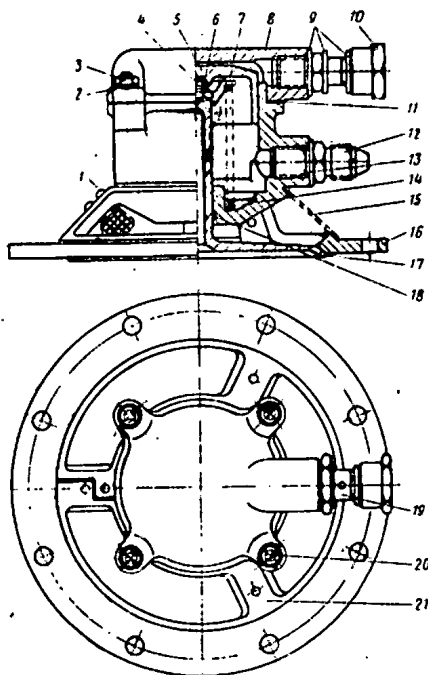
Air bleed valve - 1. Rivet; 2. Lock washer; 3. Nut for fastening cover; 4. Heel; 5. Piston; 6. Safety lock; 7. Plate; 8. Cover; 9. Aluminum gasket; 10. Nut; 11. Packing; 12. Tube fitting; 13. Aluminum packing; 14. Spring; 15. Screen; 16. Body; 17. Valve; 18. Ring; 19. Tube fitting; 20. Bolt for securing the cover; 21. Support
